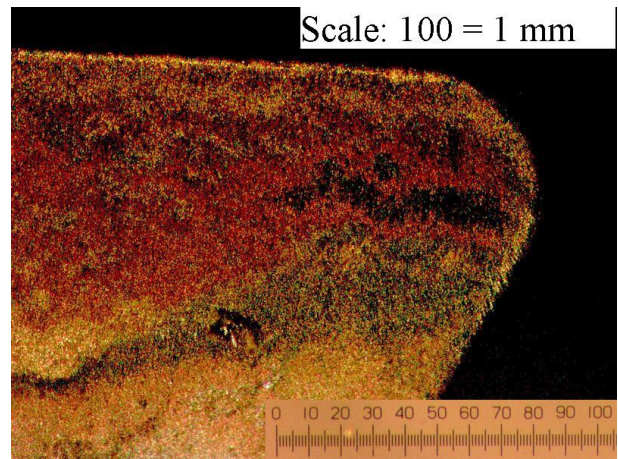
Picture showing top rake face wear for a dry cut after 7 minutes of machining at a cutting speed of 190 m min⁻¹, and feed rate of 0.23 mm/rev with a 2 mm depth of cut [7]
